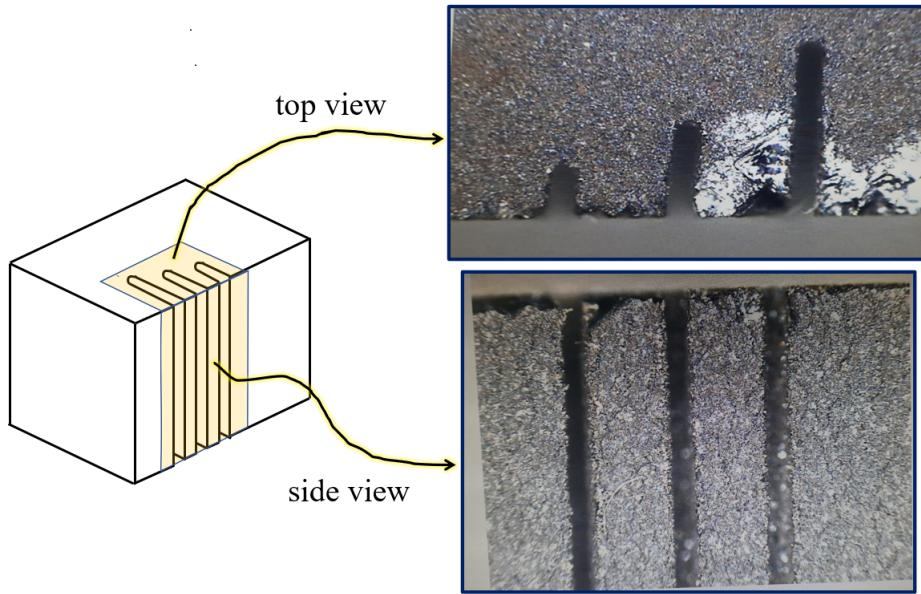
Cut part schematic view and enlarged view obtained by Rapid Eye Microscope
